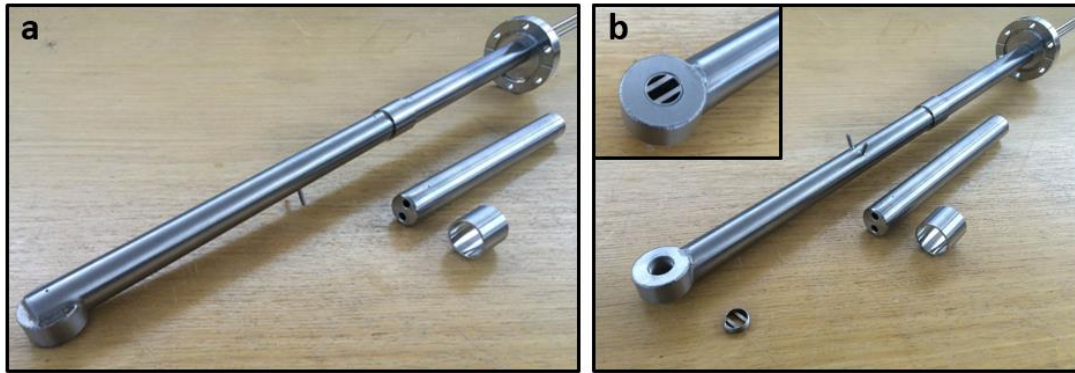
Fabricated cooling assembly². (a) Picture of cooling assembly from the top view with extra insulating sleeve and alignment collar. (b) Picture of cooling assembly from the bottom view showing the sample chamber and sample stage. Inset shows sample stage installed. Assembly fabricated by CSE machine shop, University of Minnesota.
